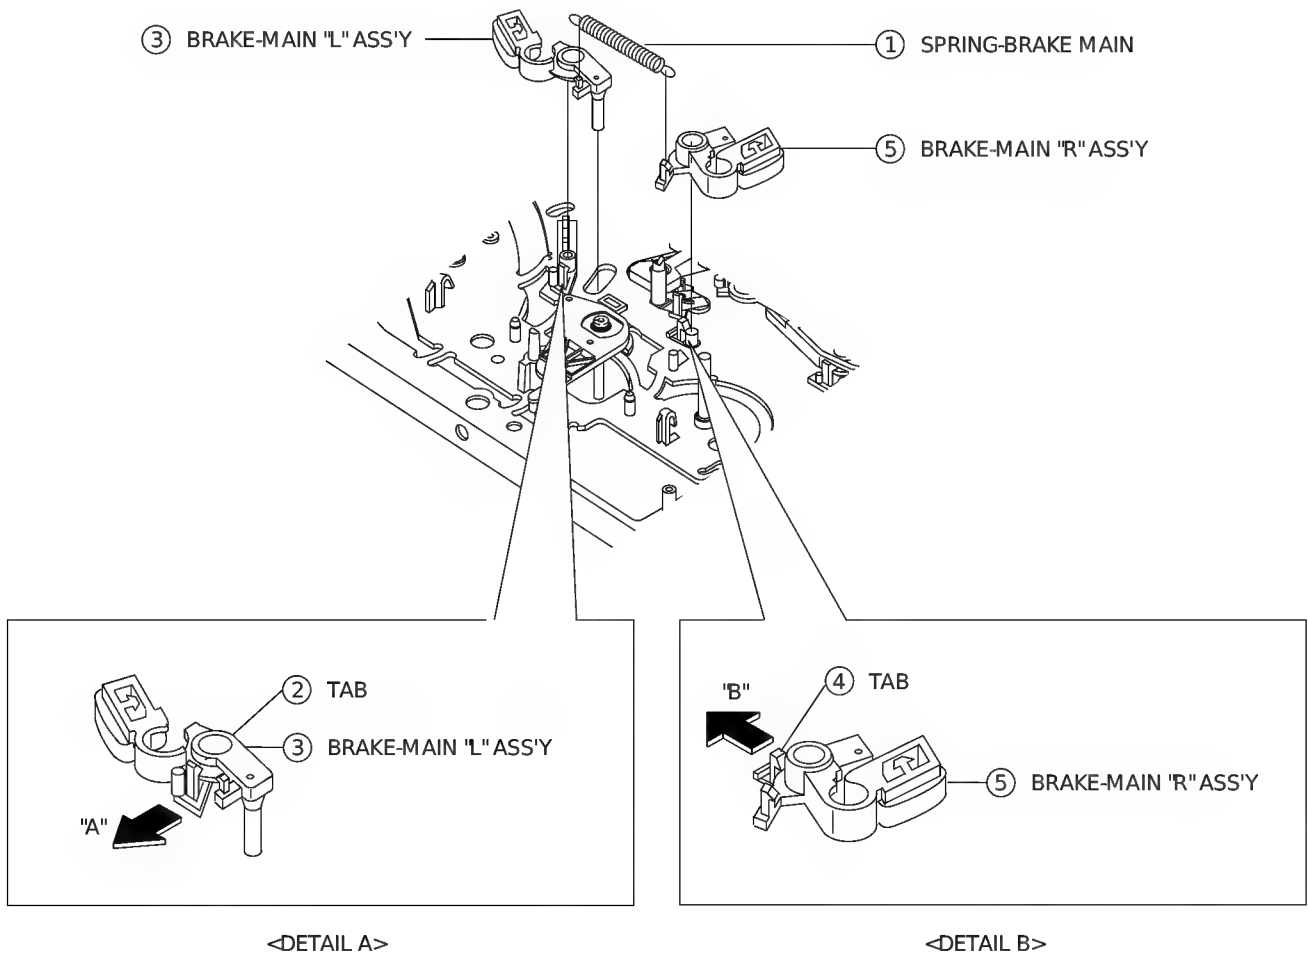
Brake Main "L", "R" Ass'y Removal
